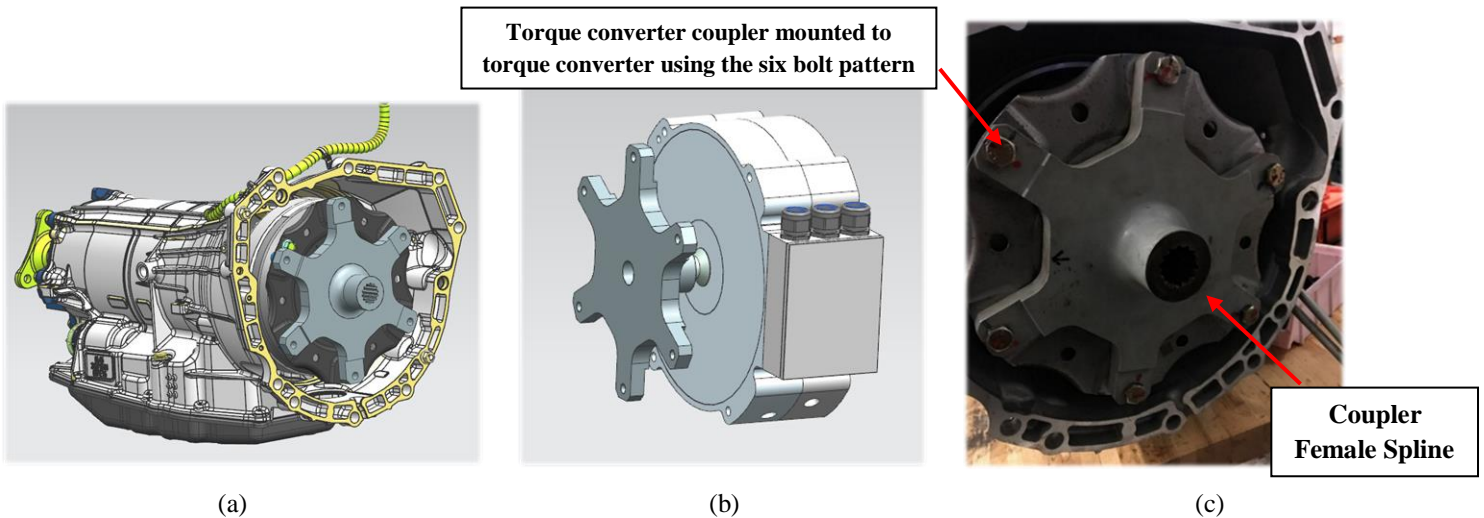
Torque Converter Coupler – (a) mounted on the transmission torque converter in CAD, (b) mated onto the splined shaft of the P2 motor in CAD, (c) bolted unto the transmission torque converter
